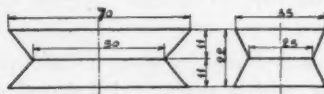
DESIGN OF CHAPLET USED TO SUPPORT CORES OF LATHE BED
